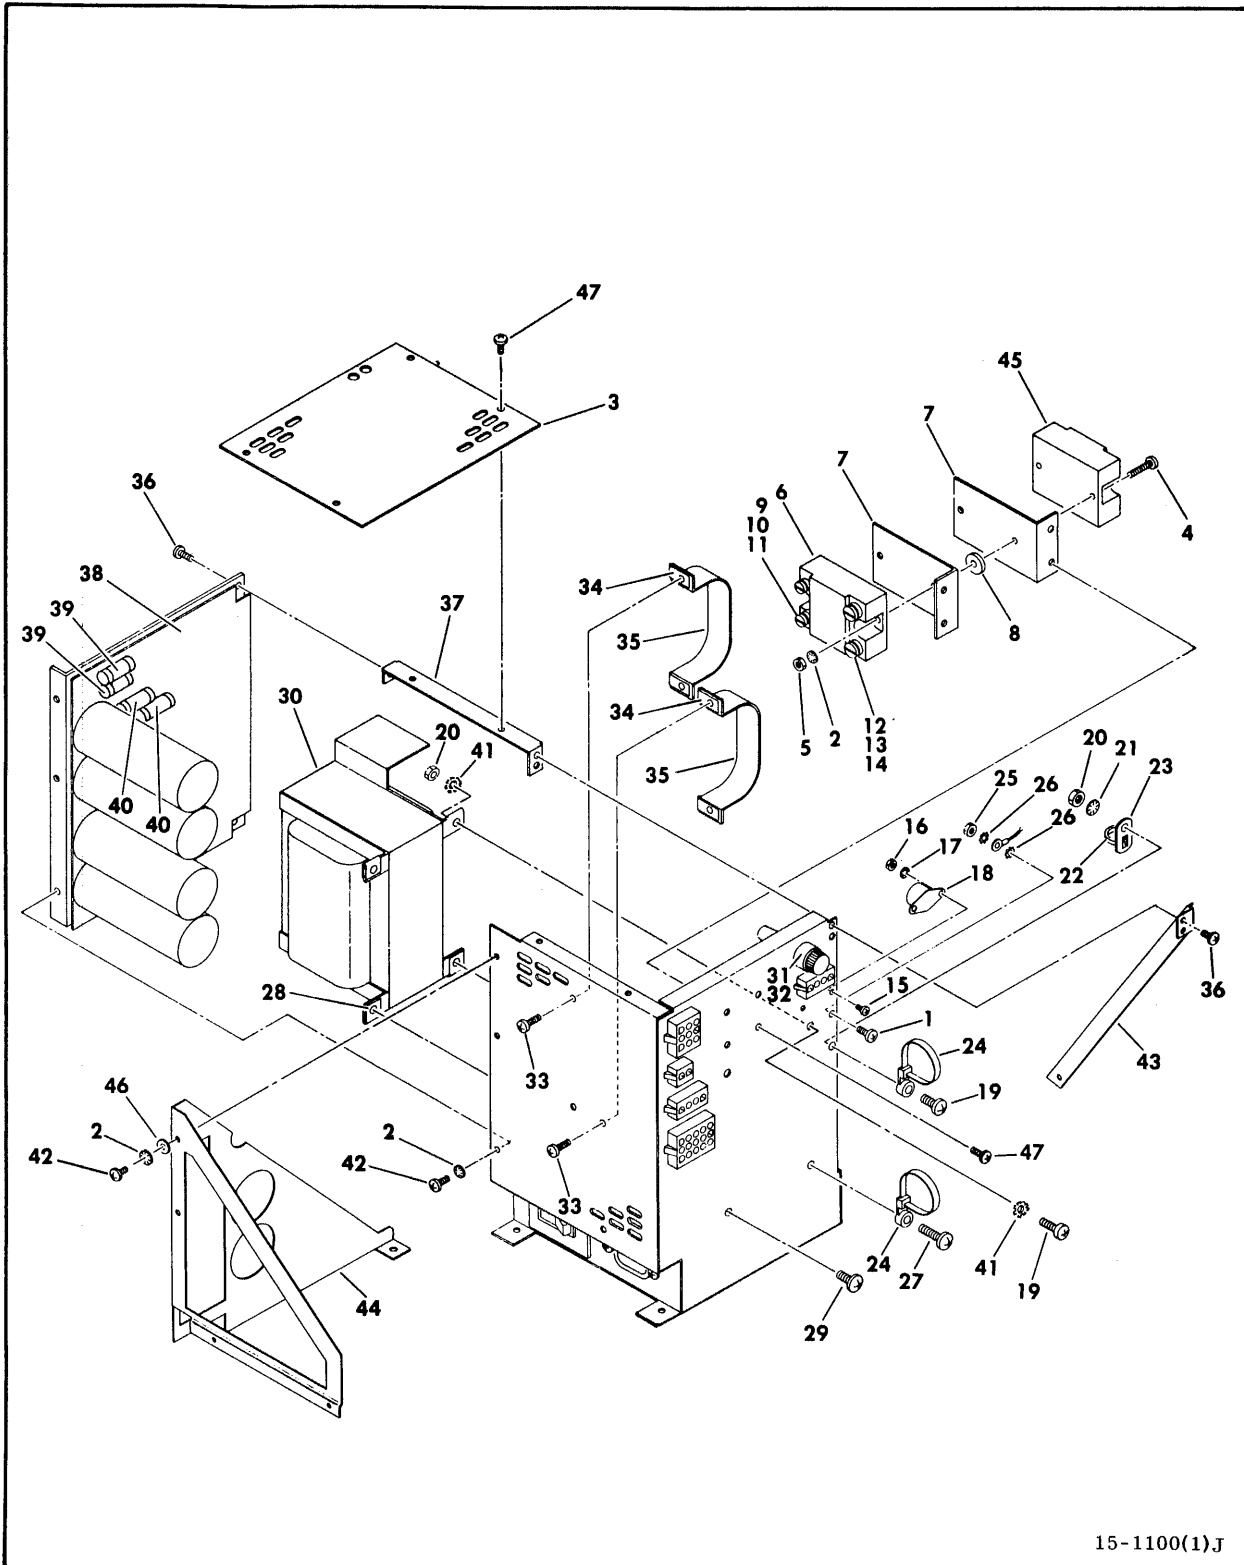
Power Supply Assembly (Sheet 1 of 2)
